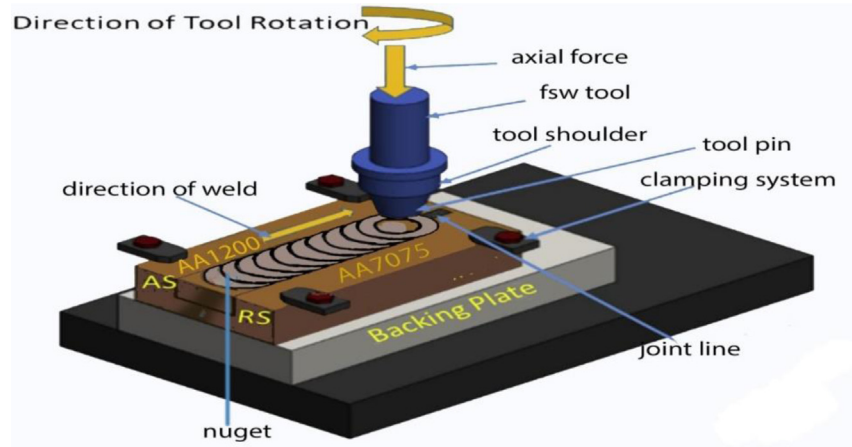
Process diagram for the two dissimilar aluminium alloys friction stir welded joint [19].
